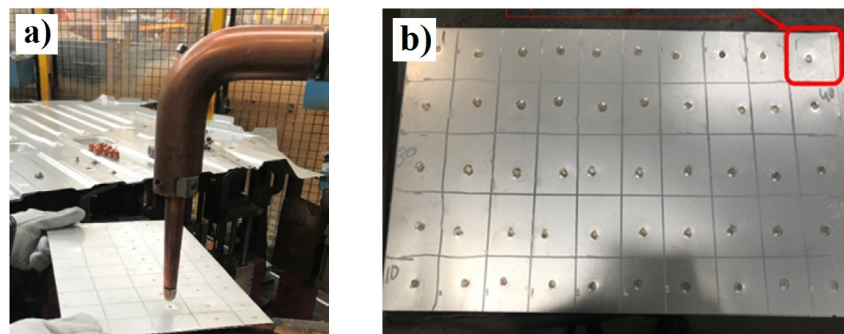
a) The RSW operation b) the resistance spot welded plates indicating the tearing test location.
